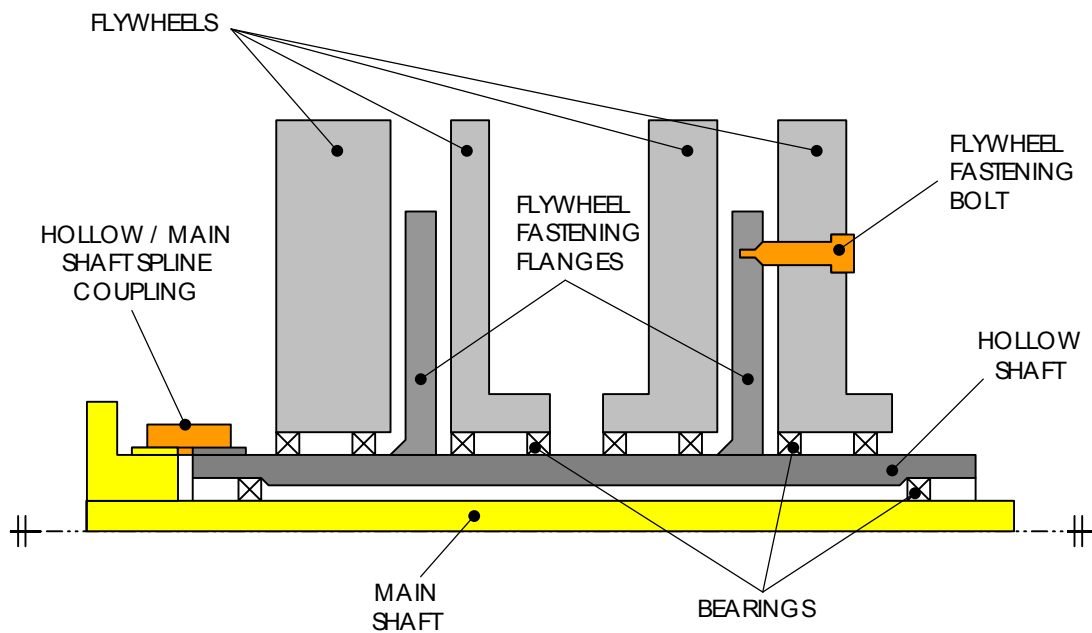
Flywheel set half-section schematic, showing hollow shaft, bearings and coupling flanges
